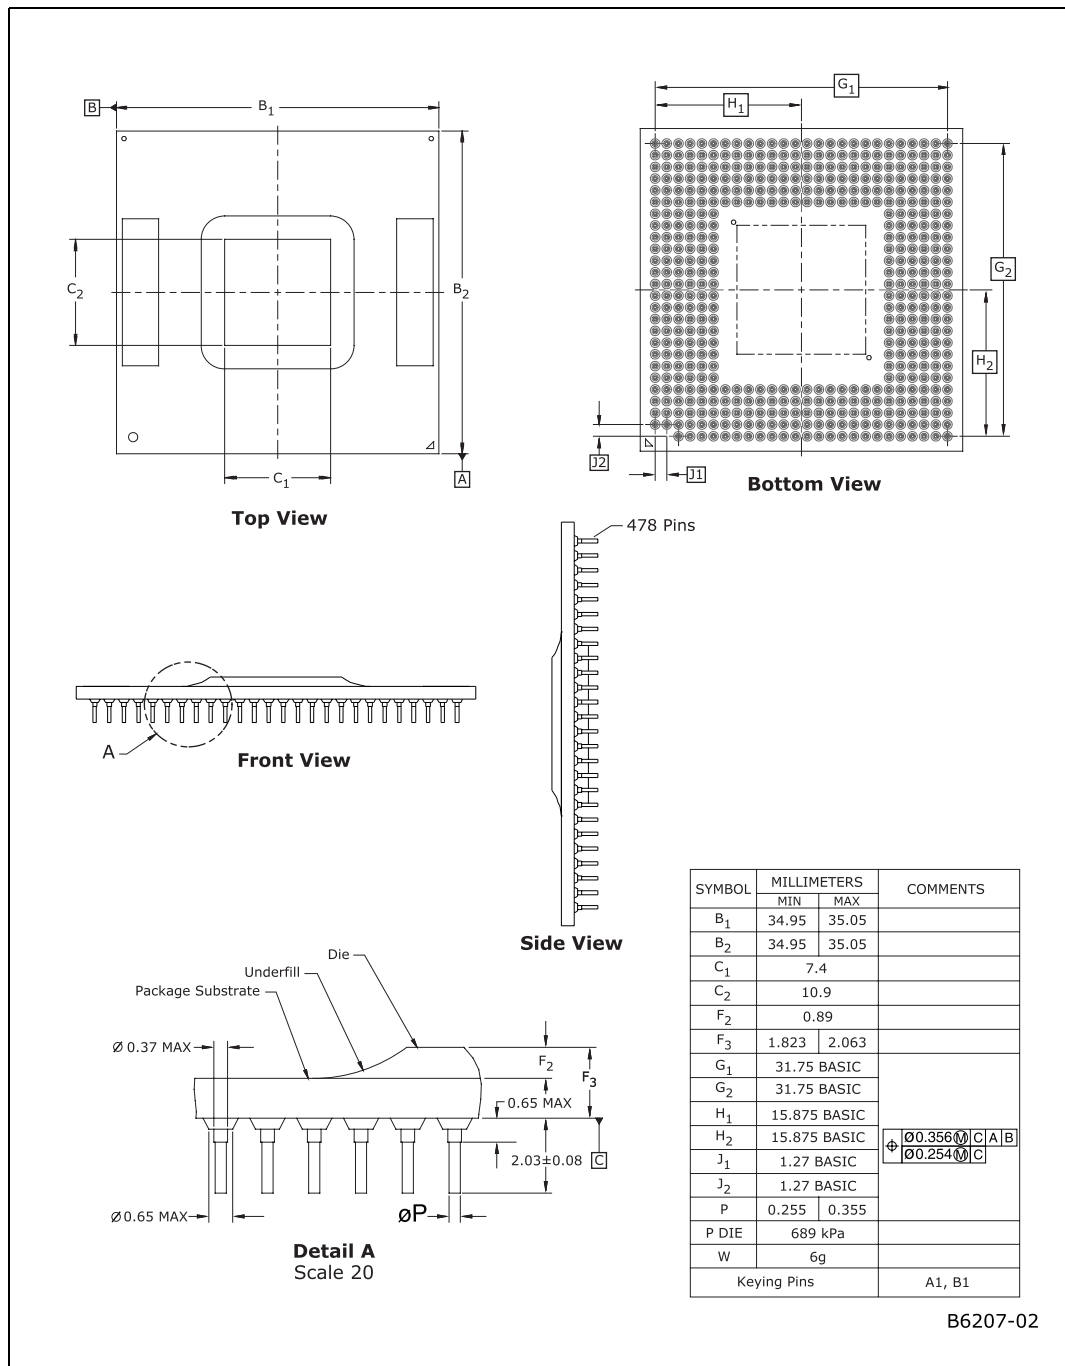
1-MB Micro-FCBGA Processor Package Drawing (1 of 2)
